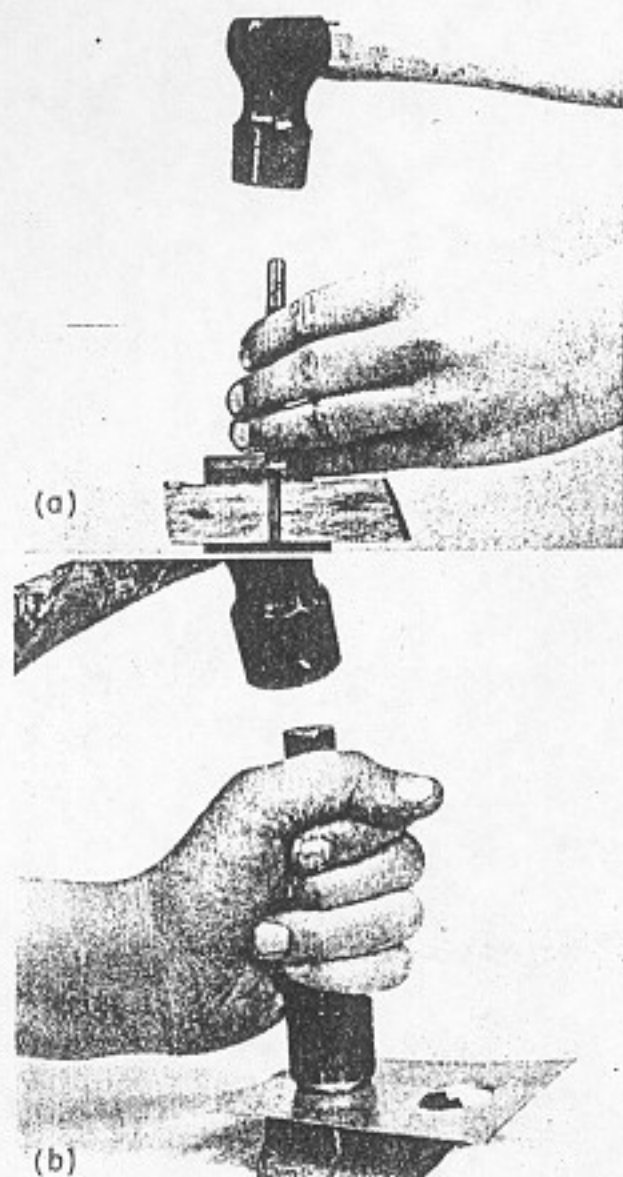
Holes in light-gage metal are made with a punch. Afterwards it is necessary to flatten the bulge or bend that is formed around the edge of the hole.
